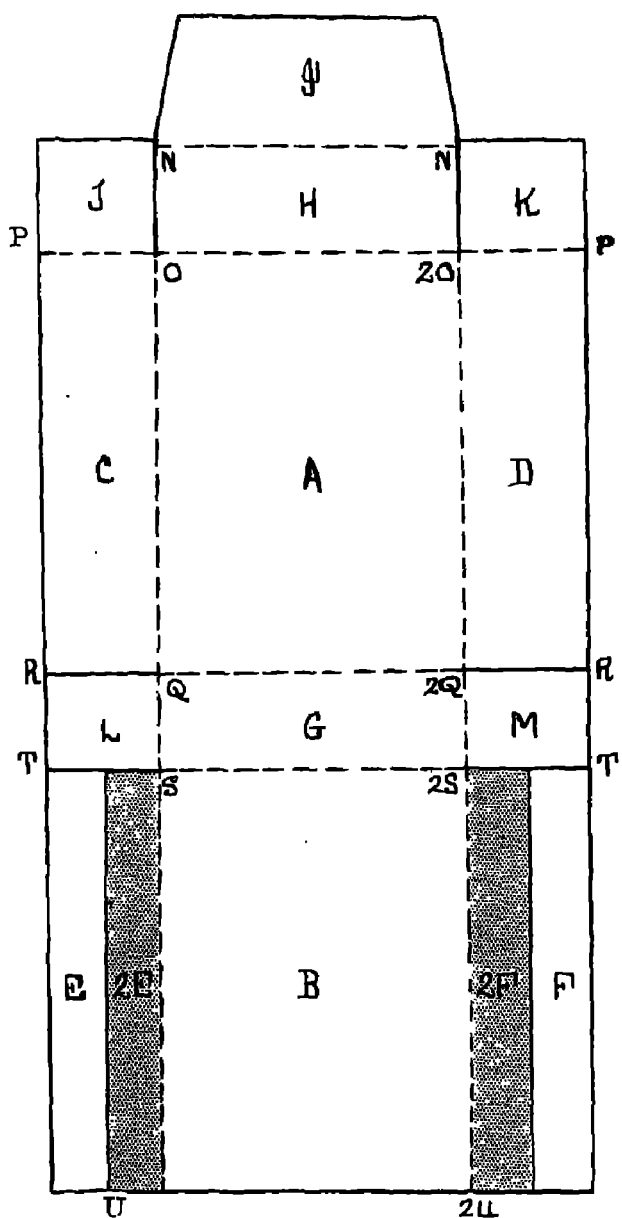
UNPRINTED CUSTARD POWDER PACKET.
